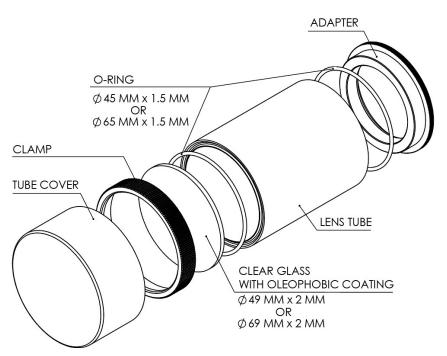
IP67 C-Mount Lens Tube, exploded drawing
